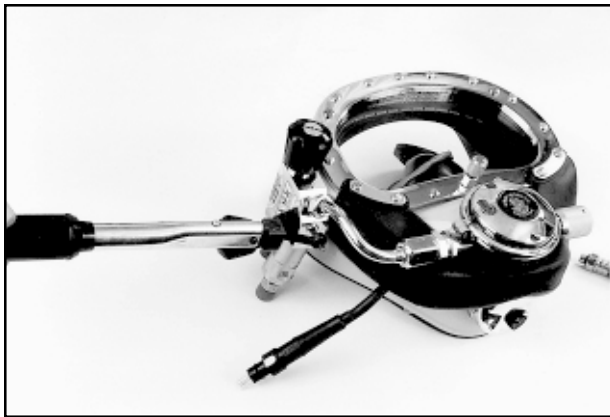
Remove the plug from the side block to install the low pressure hose.
